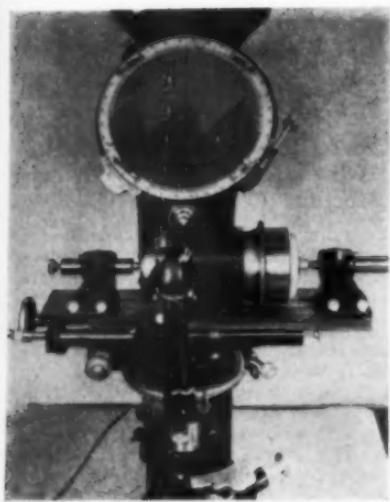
Closeup of a Comparator set-up for inspecting buttress threads on airplane cylinders.
